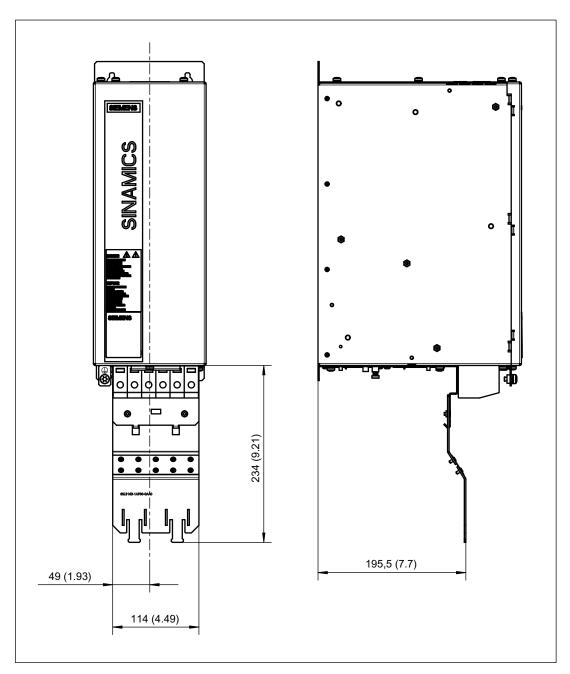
Dimension drawing of shield connecting plate on the 36 kW Active Interface Module, all dimensions in mm and (inches)
